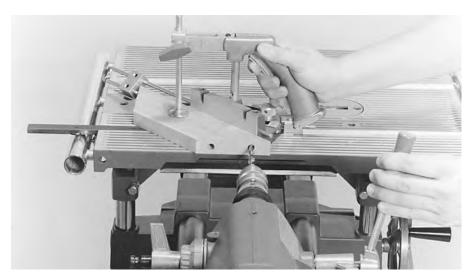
You can also bore at an angle by using the miter gauge. The miter gauge stop rod can be used to keep the bit from pushing the stock out of alignment.
